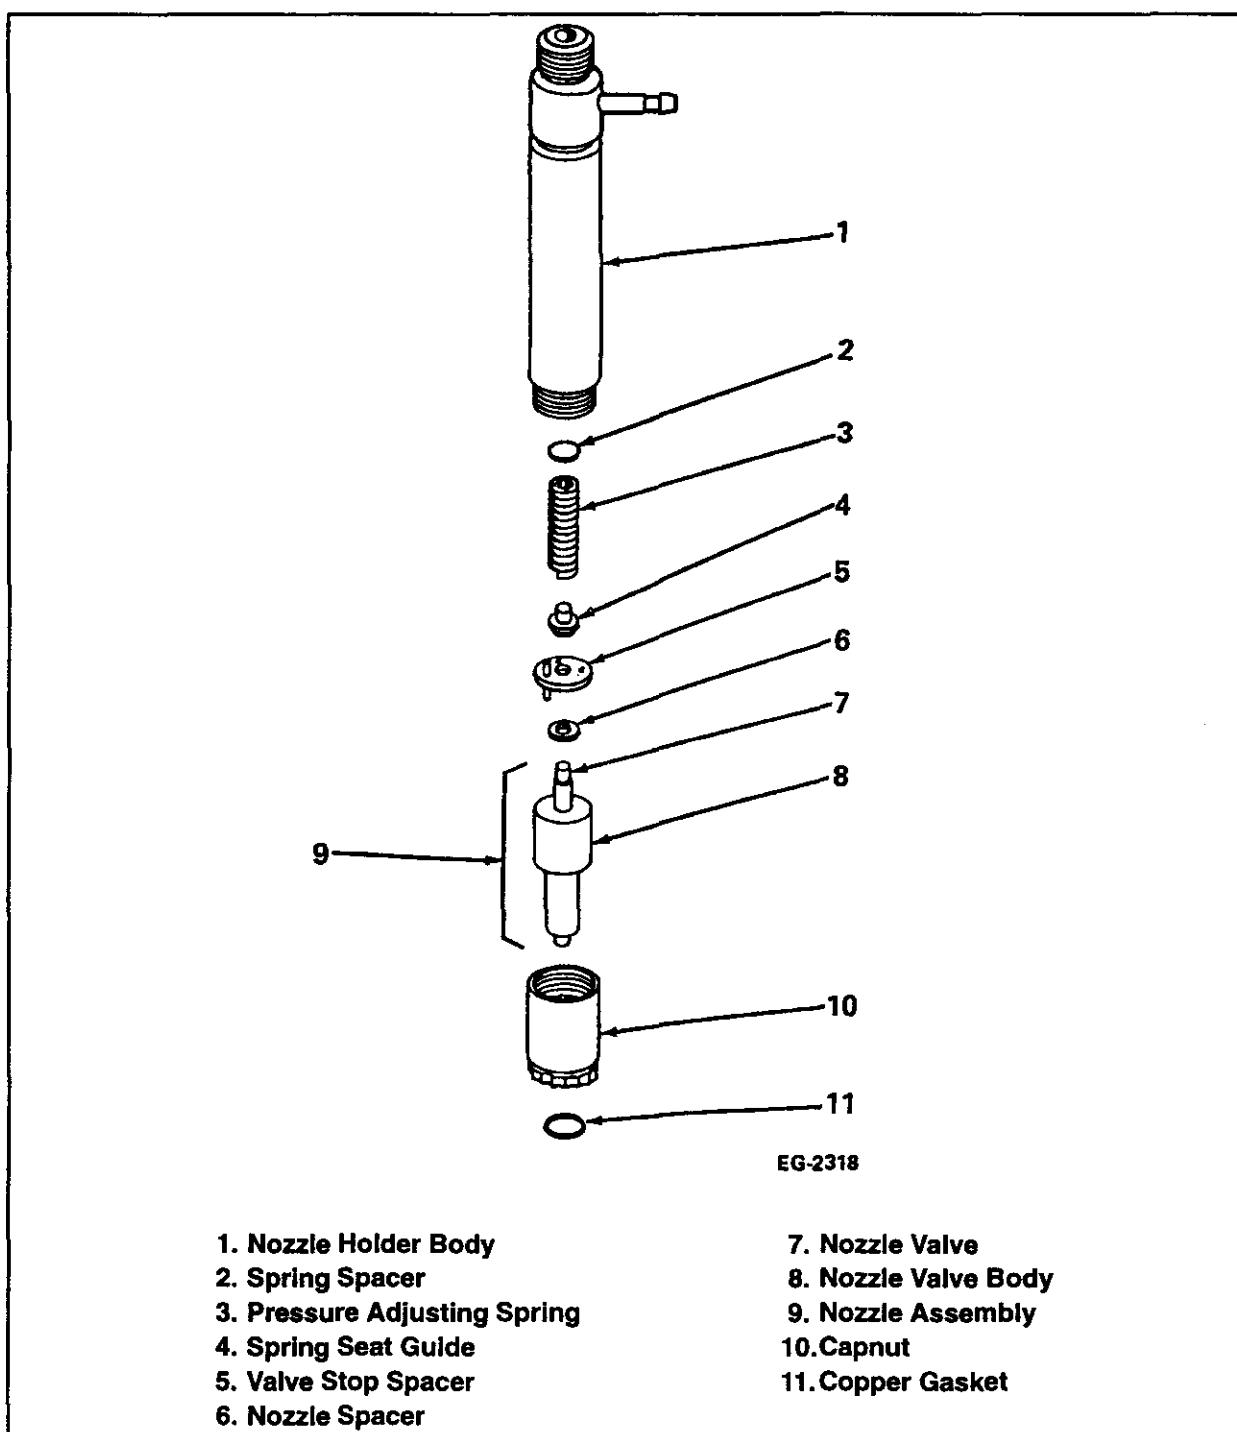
Fuel Injection Nozzle and Holder Components.
